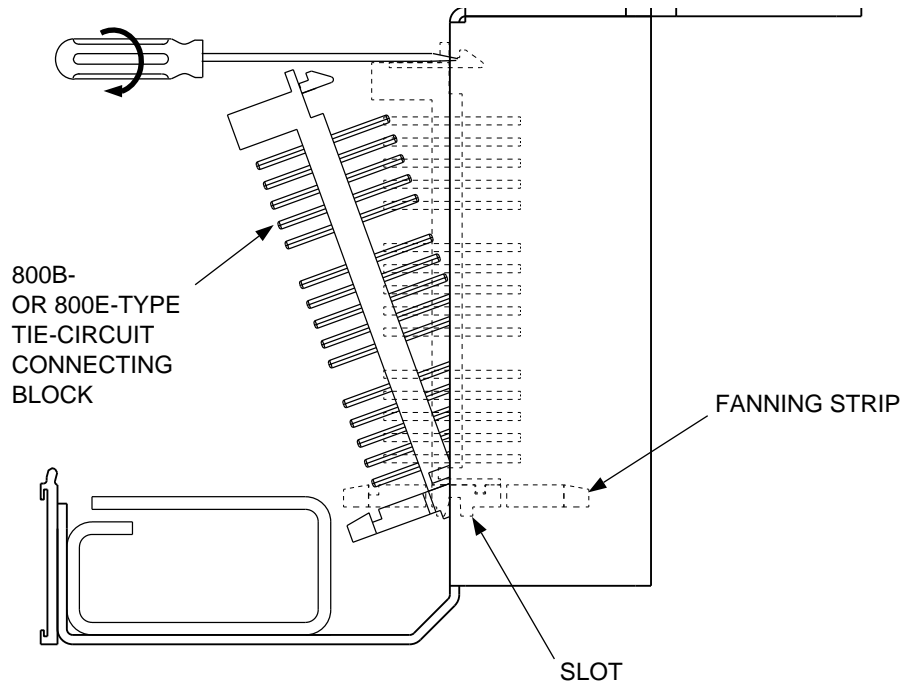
Removing an 800B-Type or 800E-Type Tie-Circuit Connecting Block
